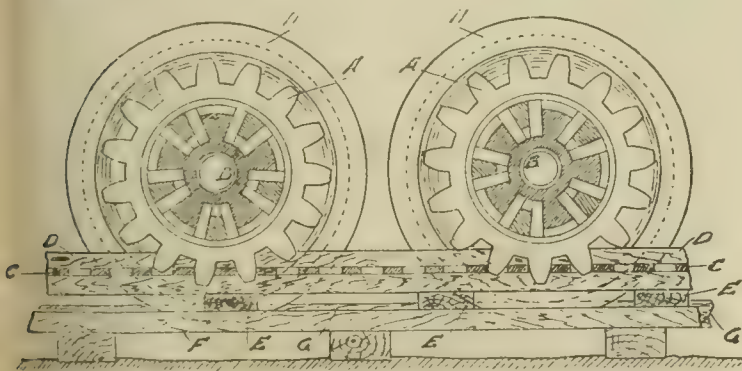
SECTION SHOWING GEARING ARRANGEMENT EMPLOYED WITH GOODMAN LOCOMOTIVE.
